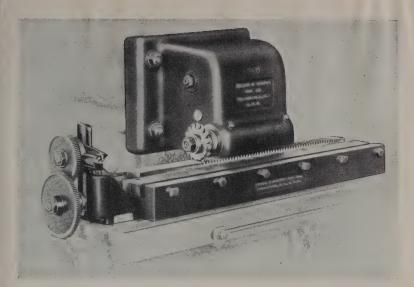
Cutting teeth in a rack, using a rack milling attachment.
